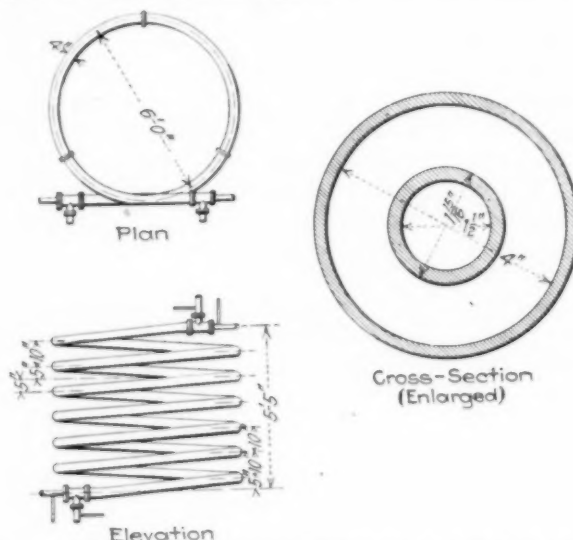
VIEWS AND CROSS-SECTION OF SPIRAL COIL COOLER NO. 3
